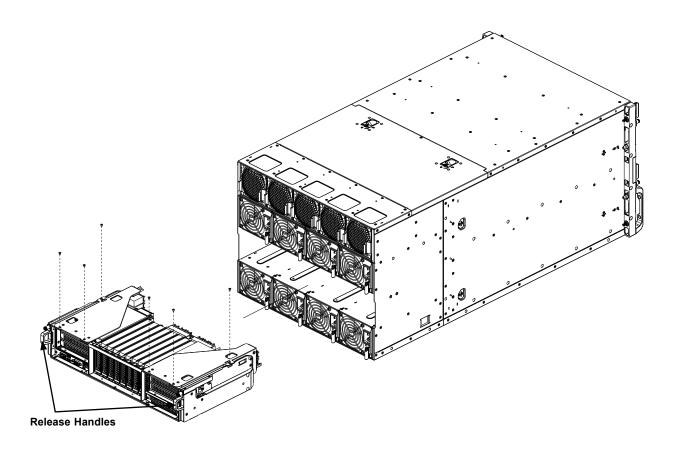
Chassis Rear: Removing the PCle Expansion Tray
